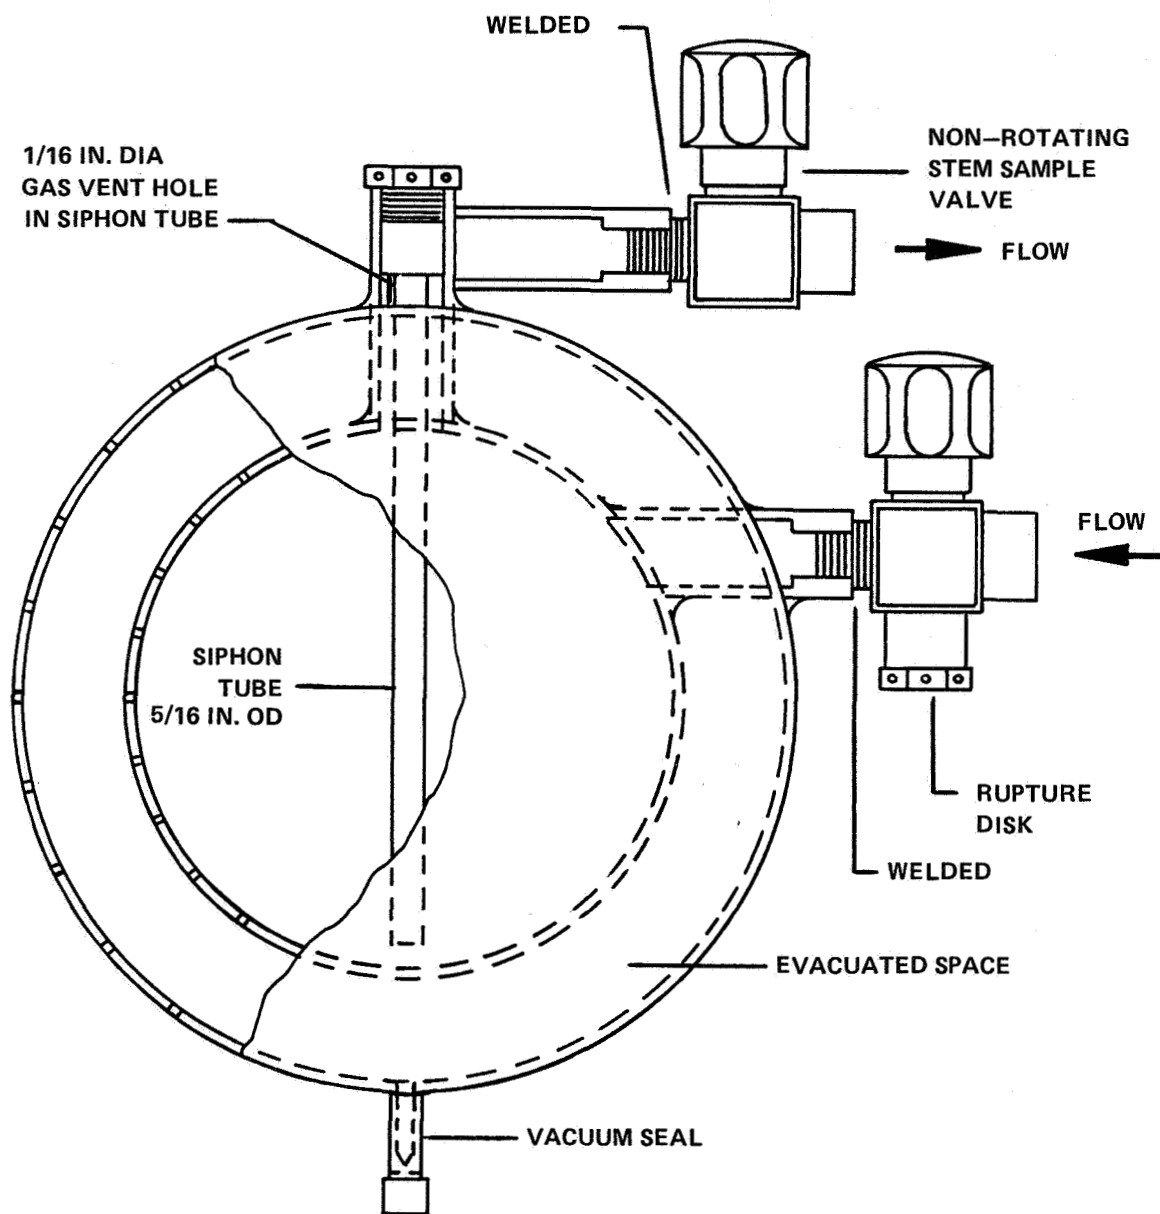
CROSS-SECTIONAL DRAWING OF A VACUUM PYCNOMETER
